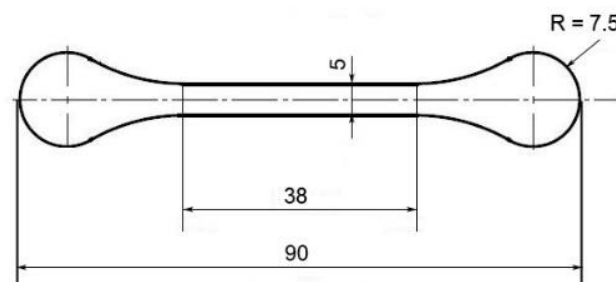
The “dog bone” shaped cavity geometry of the molds for tensile tests, the dimensions are in (mm) [104].
